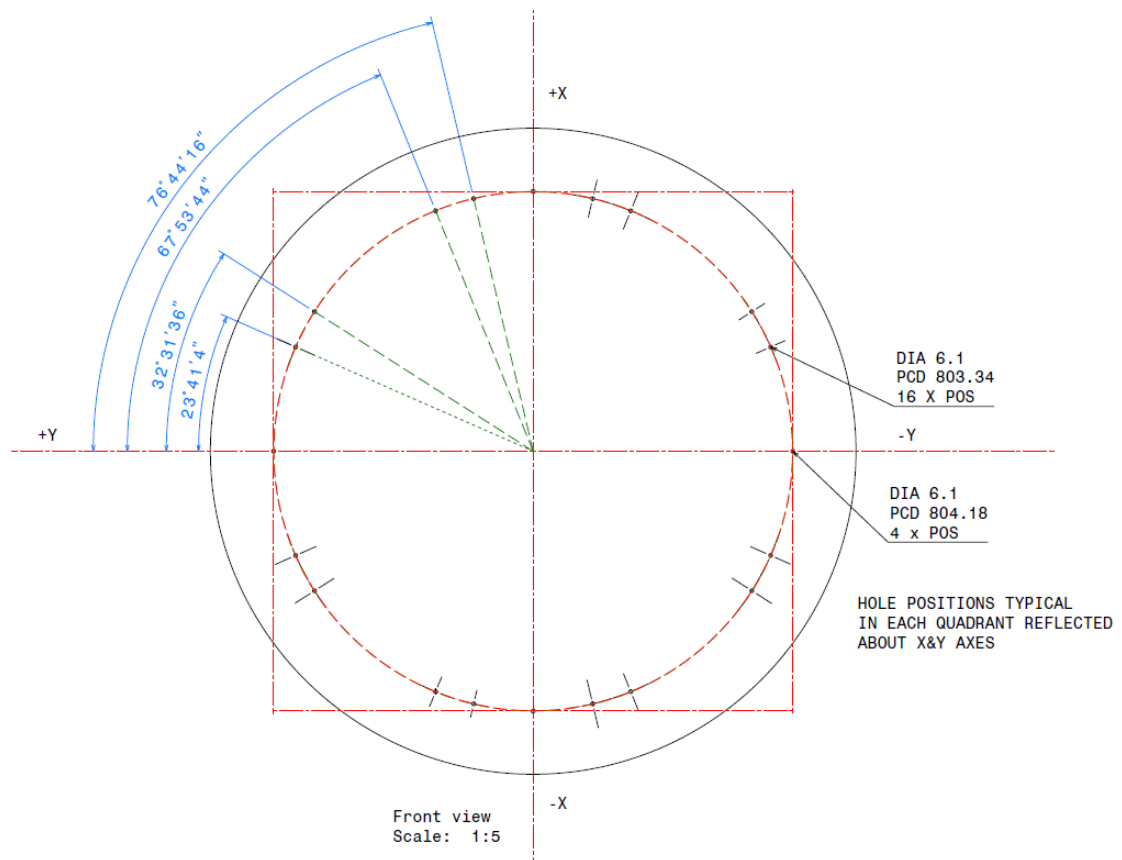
Extract from drawing showing hole positions for mid to lower cylinder brackets during assembly.
